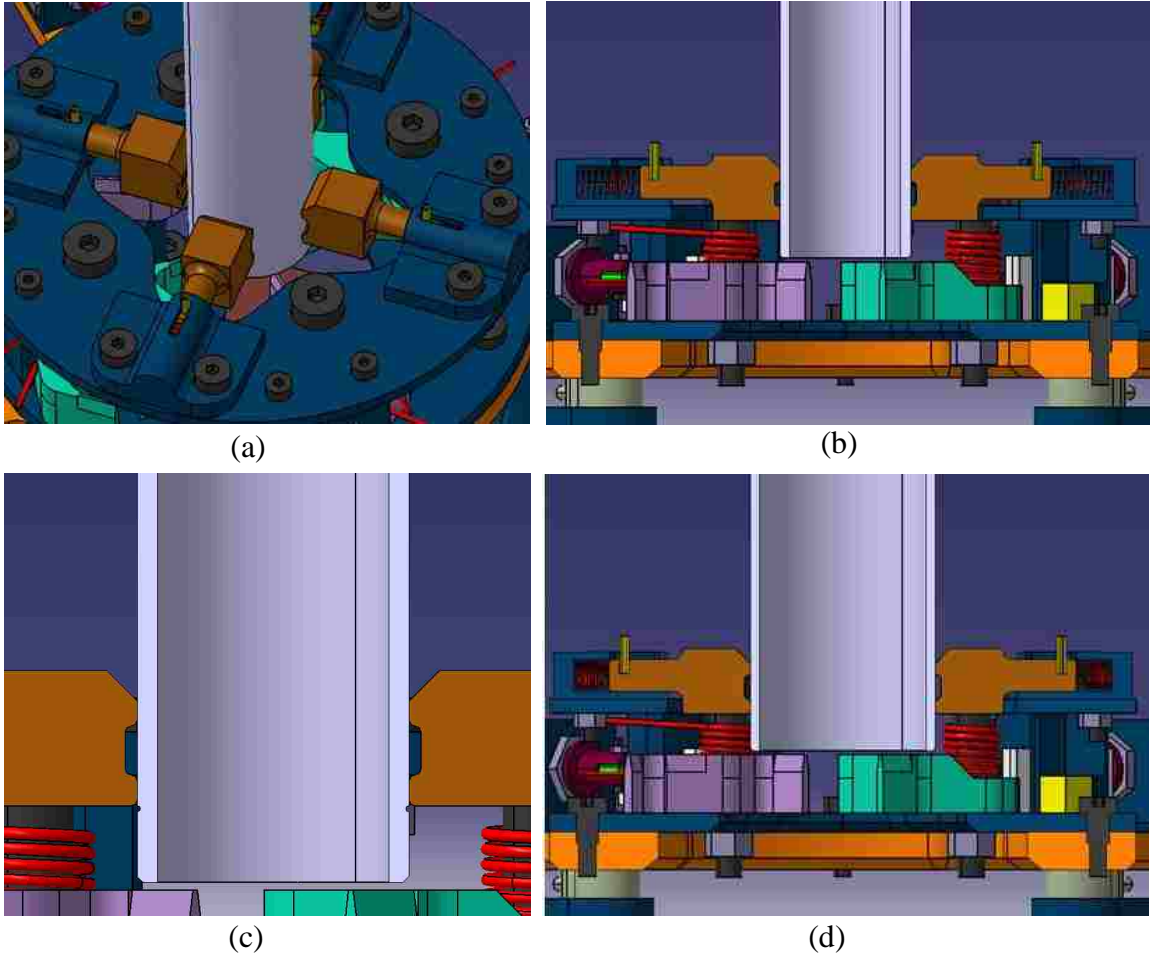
CAD model of the compression spring loaded 4-jaw chuck. (a) Isometric view. (b) Section view with 44.45 mm diameter extrusion. (c) Small positioning groove on outer diameter of extrusion below bottom jaw teeth. (d) Section view with 63.5 mm diameter extrusion.
